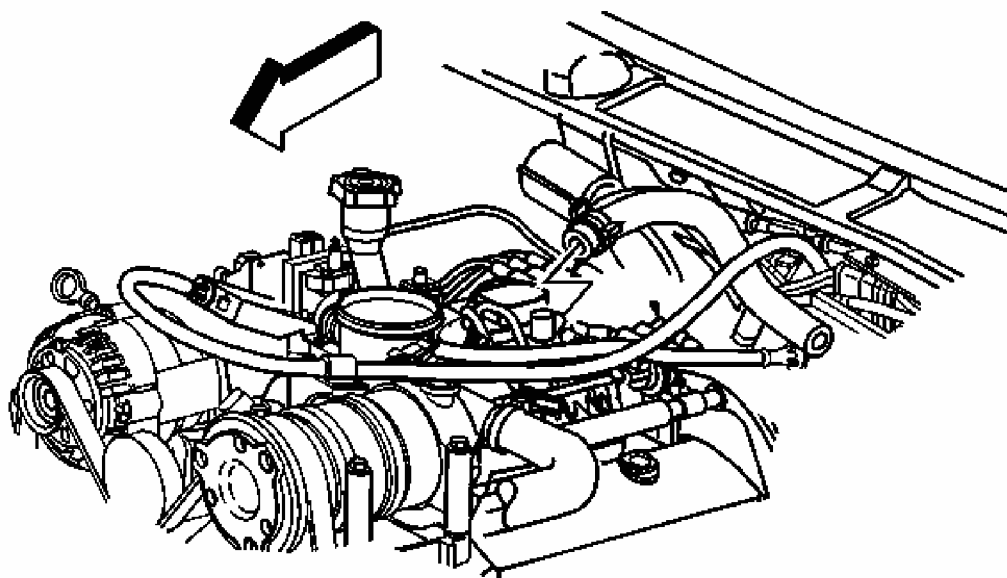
View Of Vacuum Brake Booster Hose
